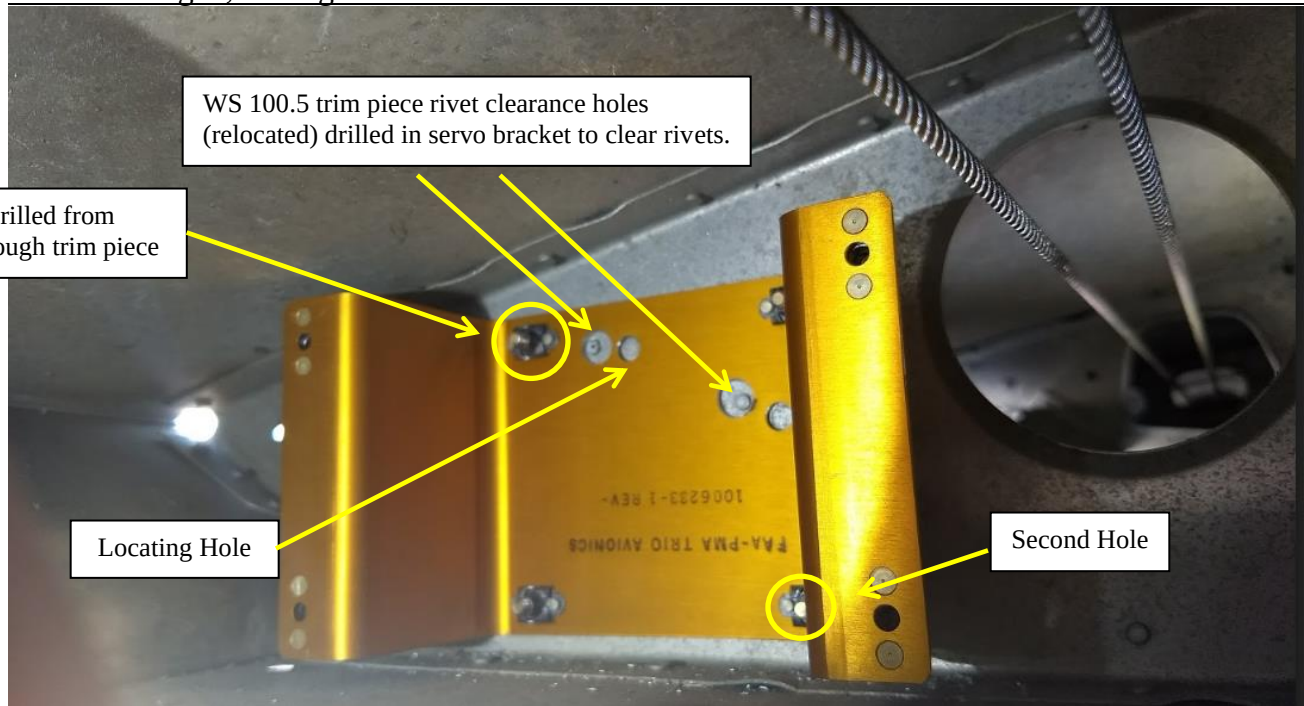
ROLL SERVO BRACKET ASSEMBLY AT FS STA 100.5
